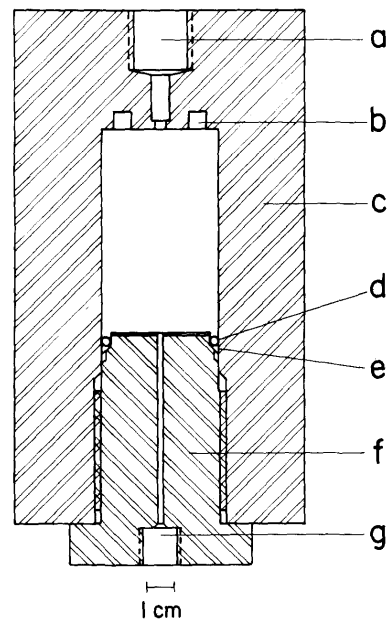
Pressure vessel for gas-loading Mao-Bell DAC reported by Mills *et al.* (a) provision for sealed gland and driving shaft; (b) bearing holes for satellite gears; (c) vessel; (d) o-ring; (e) wedge ring; (f) plug; (g) HP gas inlet (after Ref. [30]).
